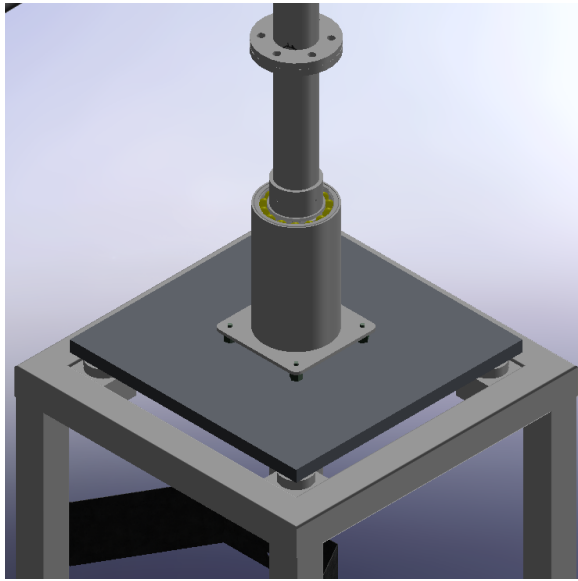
CAD model of main bearing assembly, showing top mounting plate, height collet, bearings, load cells, and tower segmenting flange
